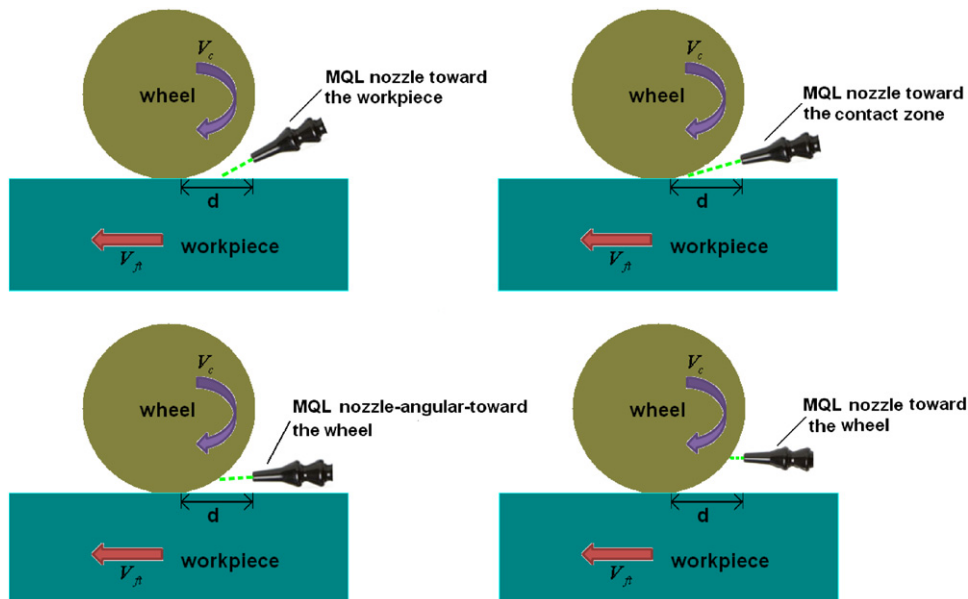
Different MQL spray nozzle positions near the wheel–workpiece contact zone.
